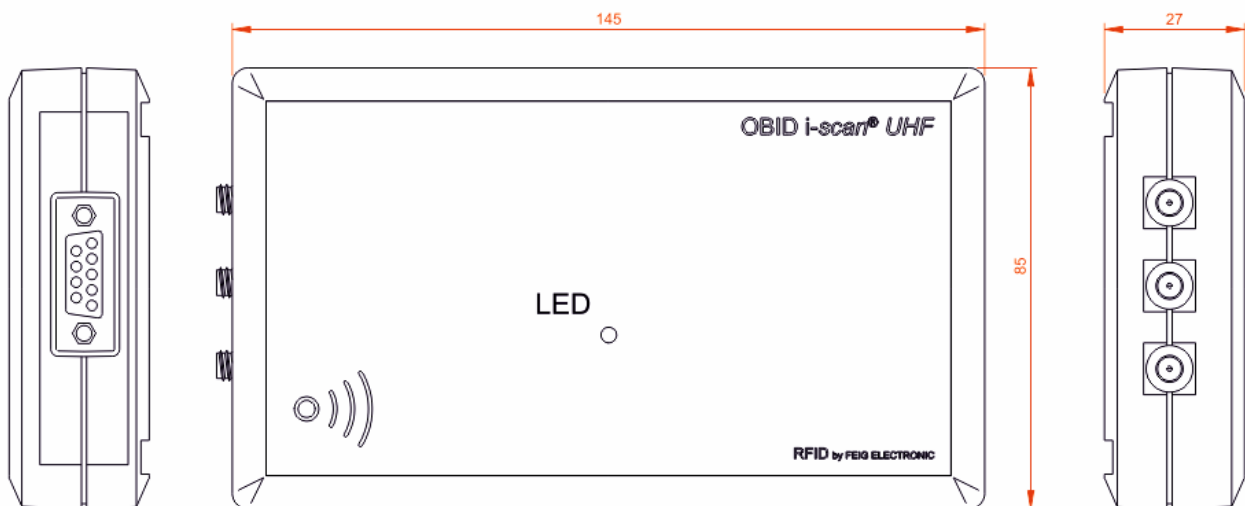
Viewing and Dimensions ID ISC.MRU102-A (all dimensions in mm)
